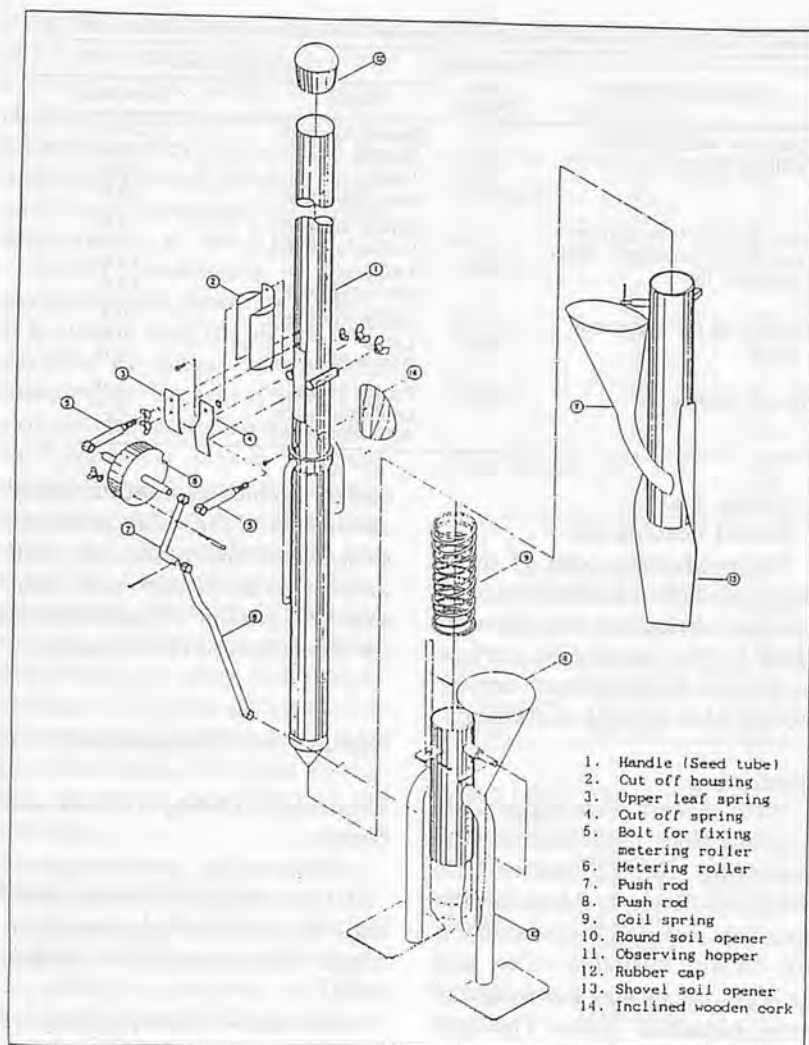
Exploded view of seeder with round soil opener and replaceable shovel soil opener.
